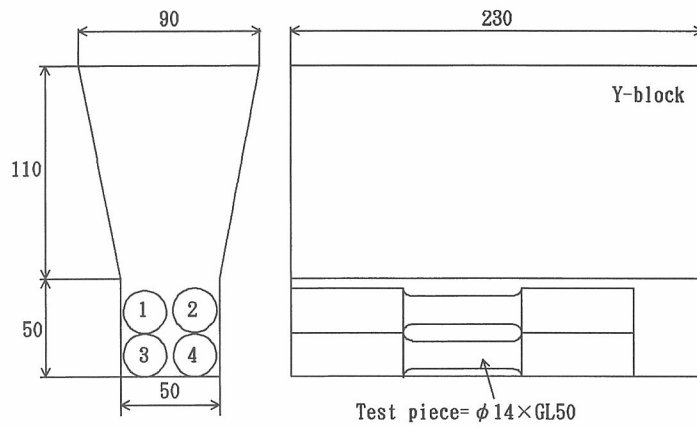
Schematic illustration of Y-block and tensile test pieces. Dimensions in mm
